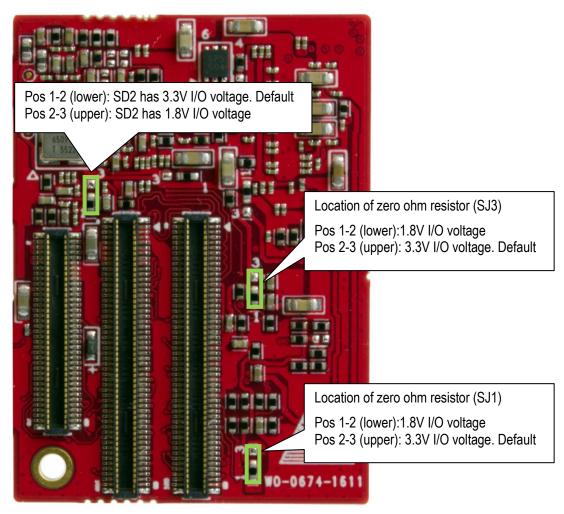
iMX 7Dual uCOM Board, Bottom Side Photo
